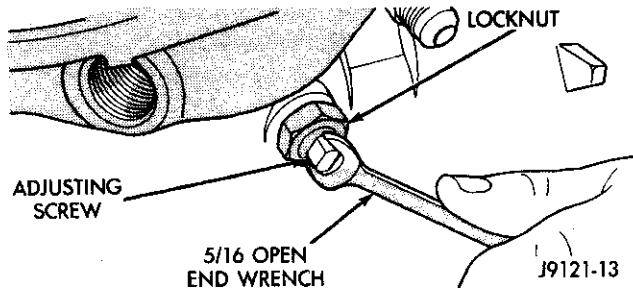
Tightening Front Band To Hold Front Clutch In Place
